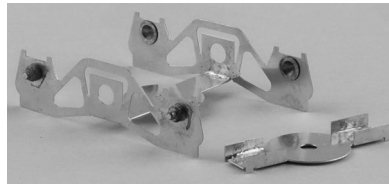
The sides of the bogie frame have been folded to 90° and have been secured with solder. The bolster overlay has also been folded and soldered
